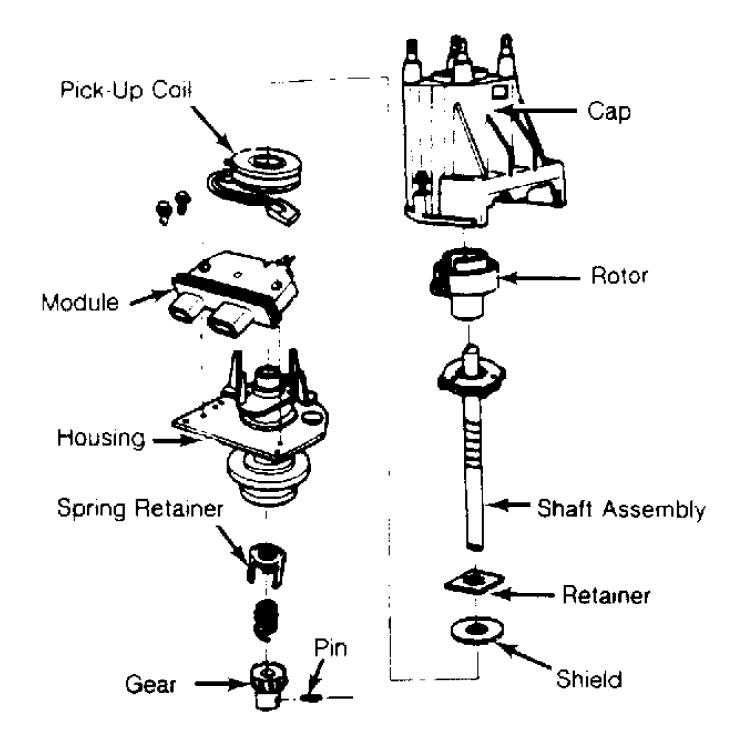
Exploded View of HEI-EST Distributor With Sealed Connector Courtesy of General Motors Corp.
